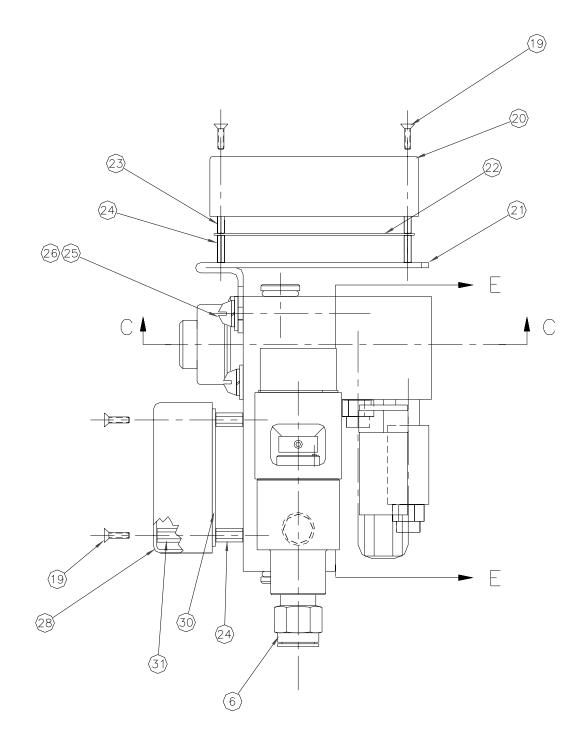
Side View of Remote Back Panel Without Enclosure & Back Panel
